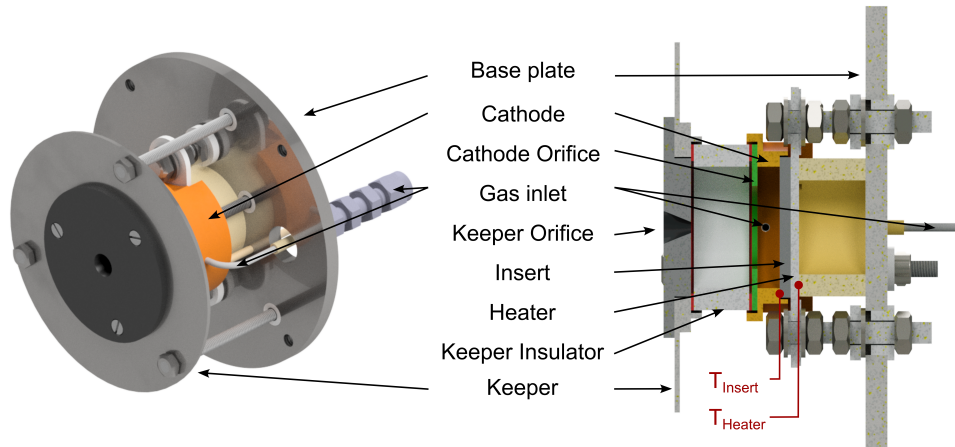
CAD model of the planar cathode design version 2 in isometric view (left hand side) and cut view (right hand side) with relevant design parts indicated. The positions of the two thermocouples are indicated in red.
